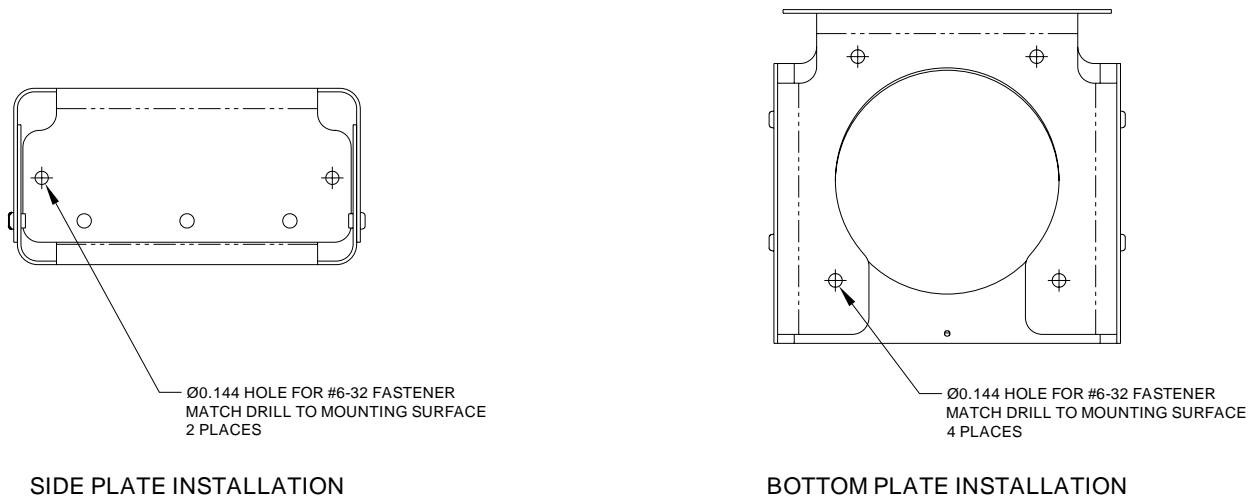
Possible Hole-Patterns on the GMU 44 Universal Mount
